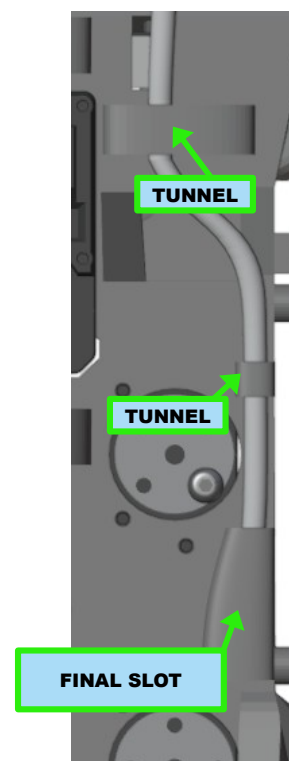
Inserting the tube into the two pass-through tunnels and then into the final slot (rear view)
